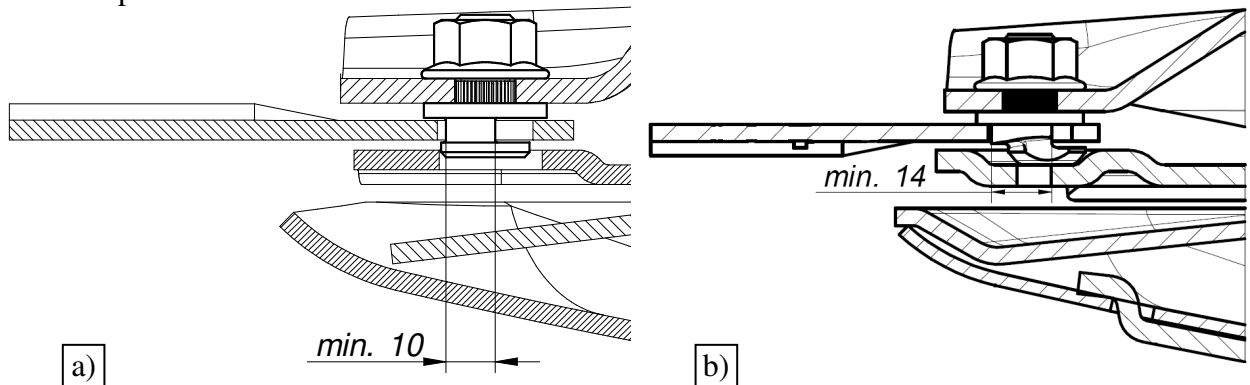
Permissible wear of knife holder pin on disk a) knife base M12 b) knife base M12 with claw
